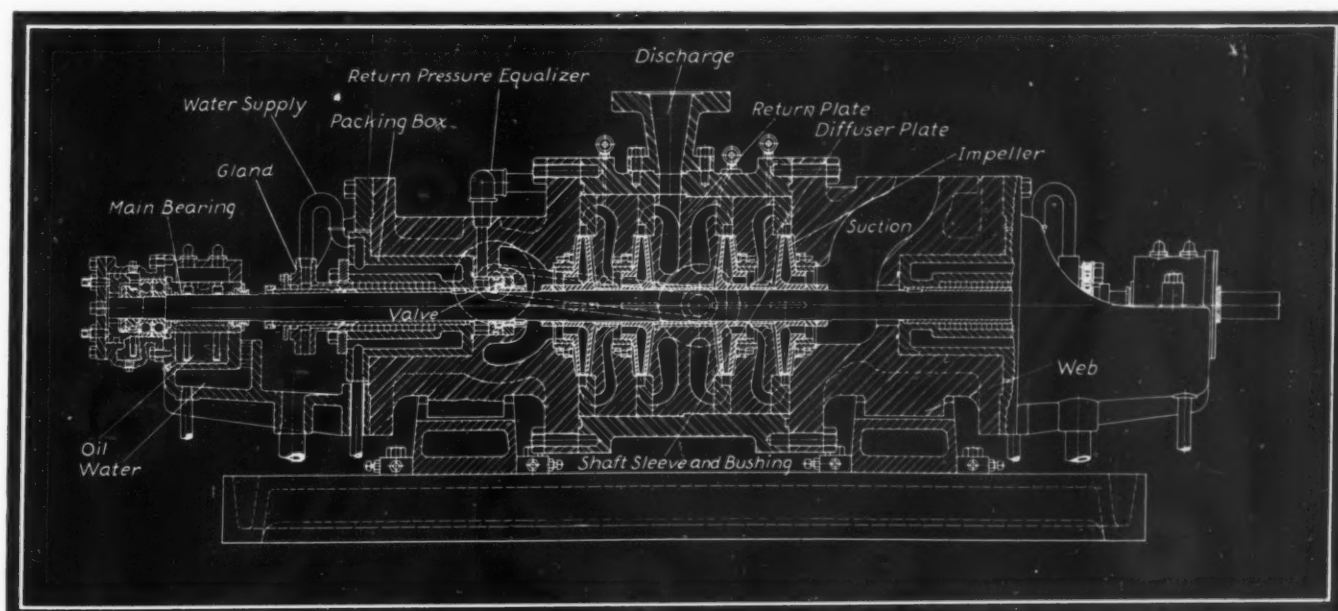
Section through 4-stage centrifugal pump shows arrangement and mounting of opposed impellers
